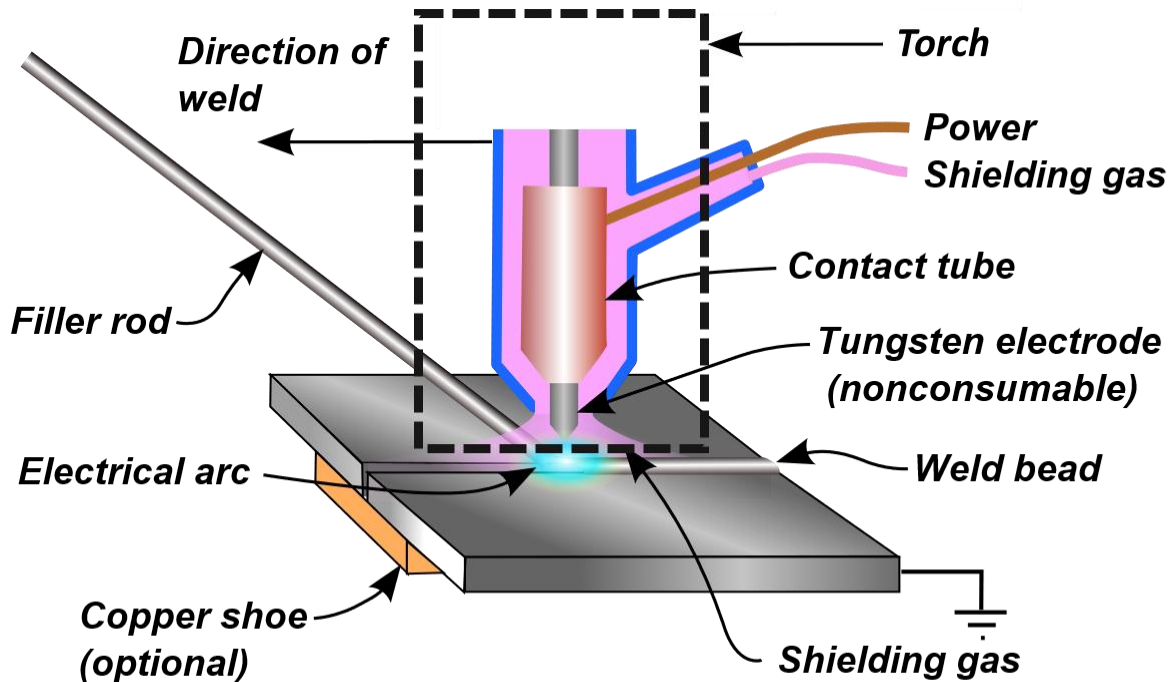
a: Schematic of the TIG welding process [8]
